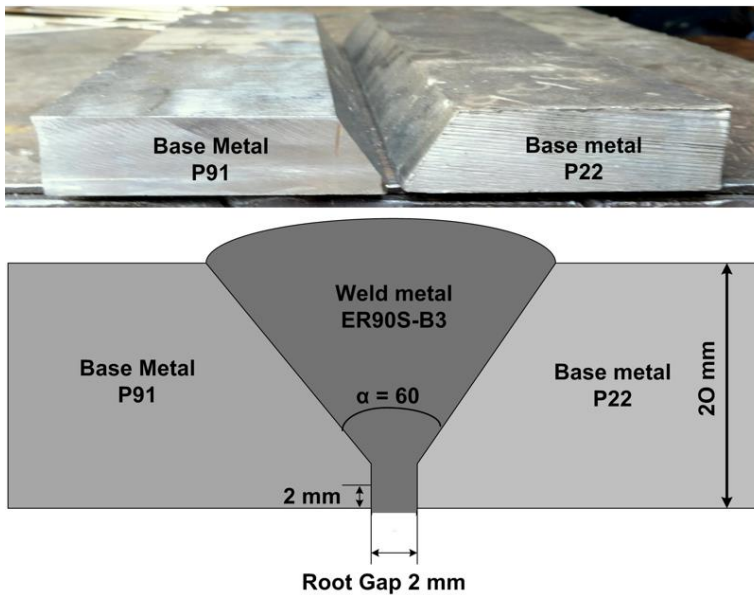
Base material plates and weld geometry of P22/P91 dissimilar weld
